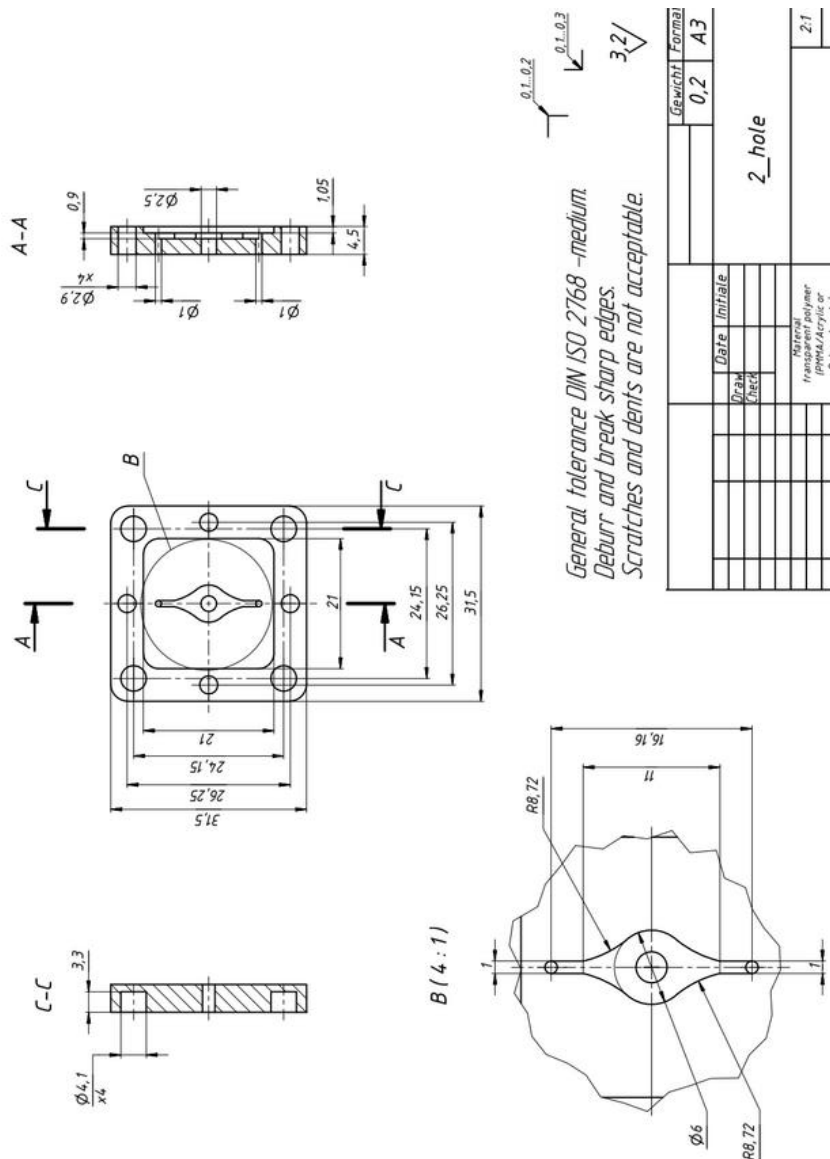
Technical drawing of the skin-on-a-chip perfusion module
